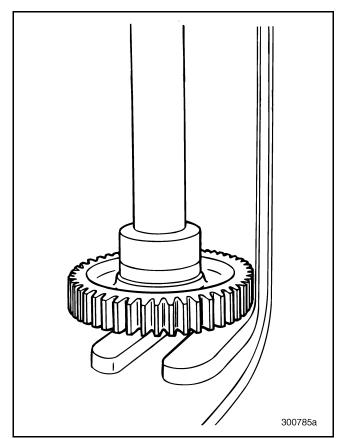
Pressing Bearing Cup into Main Drive Gear
